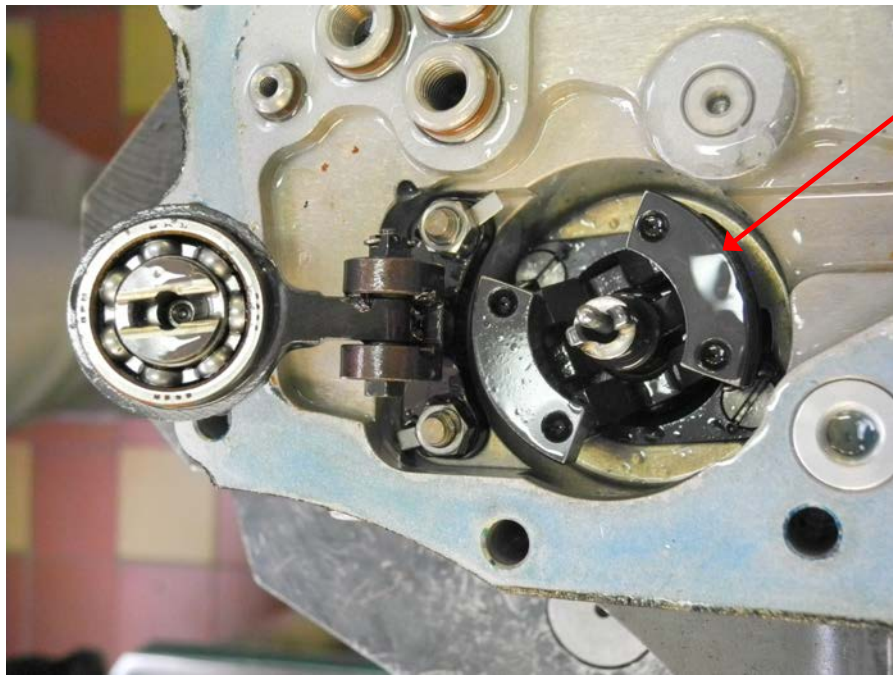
Main Metering Valve Bearing Sleeve Seal - Undamaged
